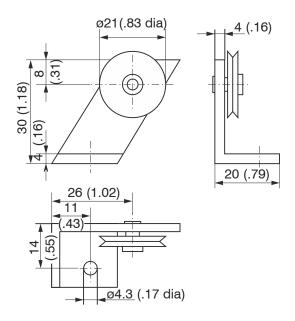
Guide pulley TR3 fix with mounting socket, dimensions in mm (inches), not to scale
